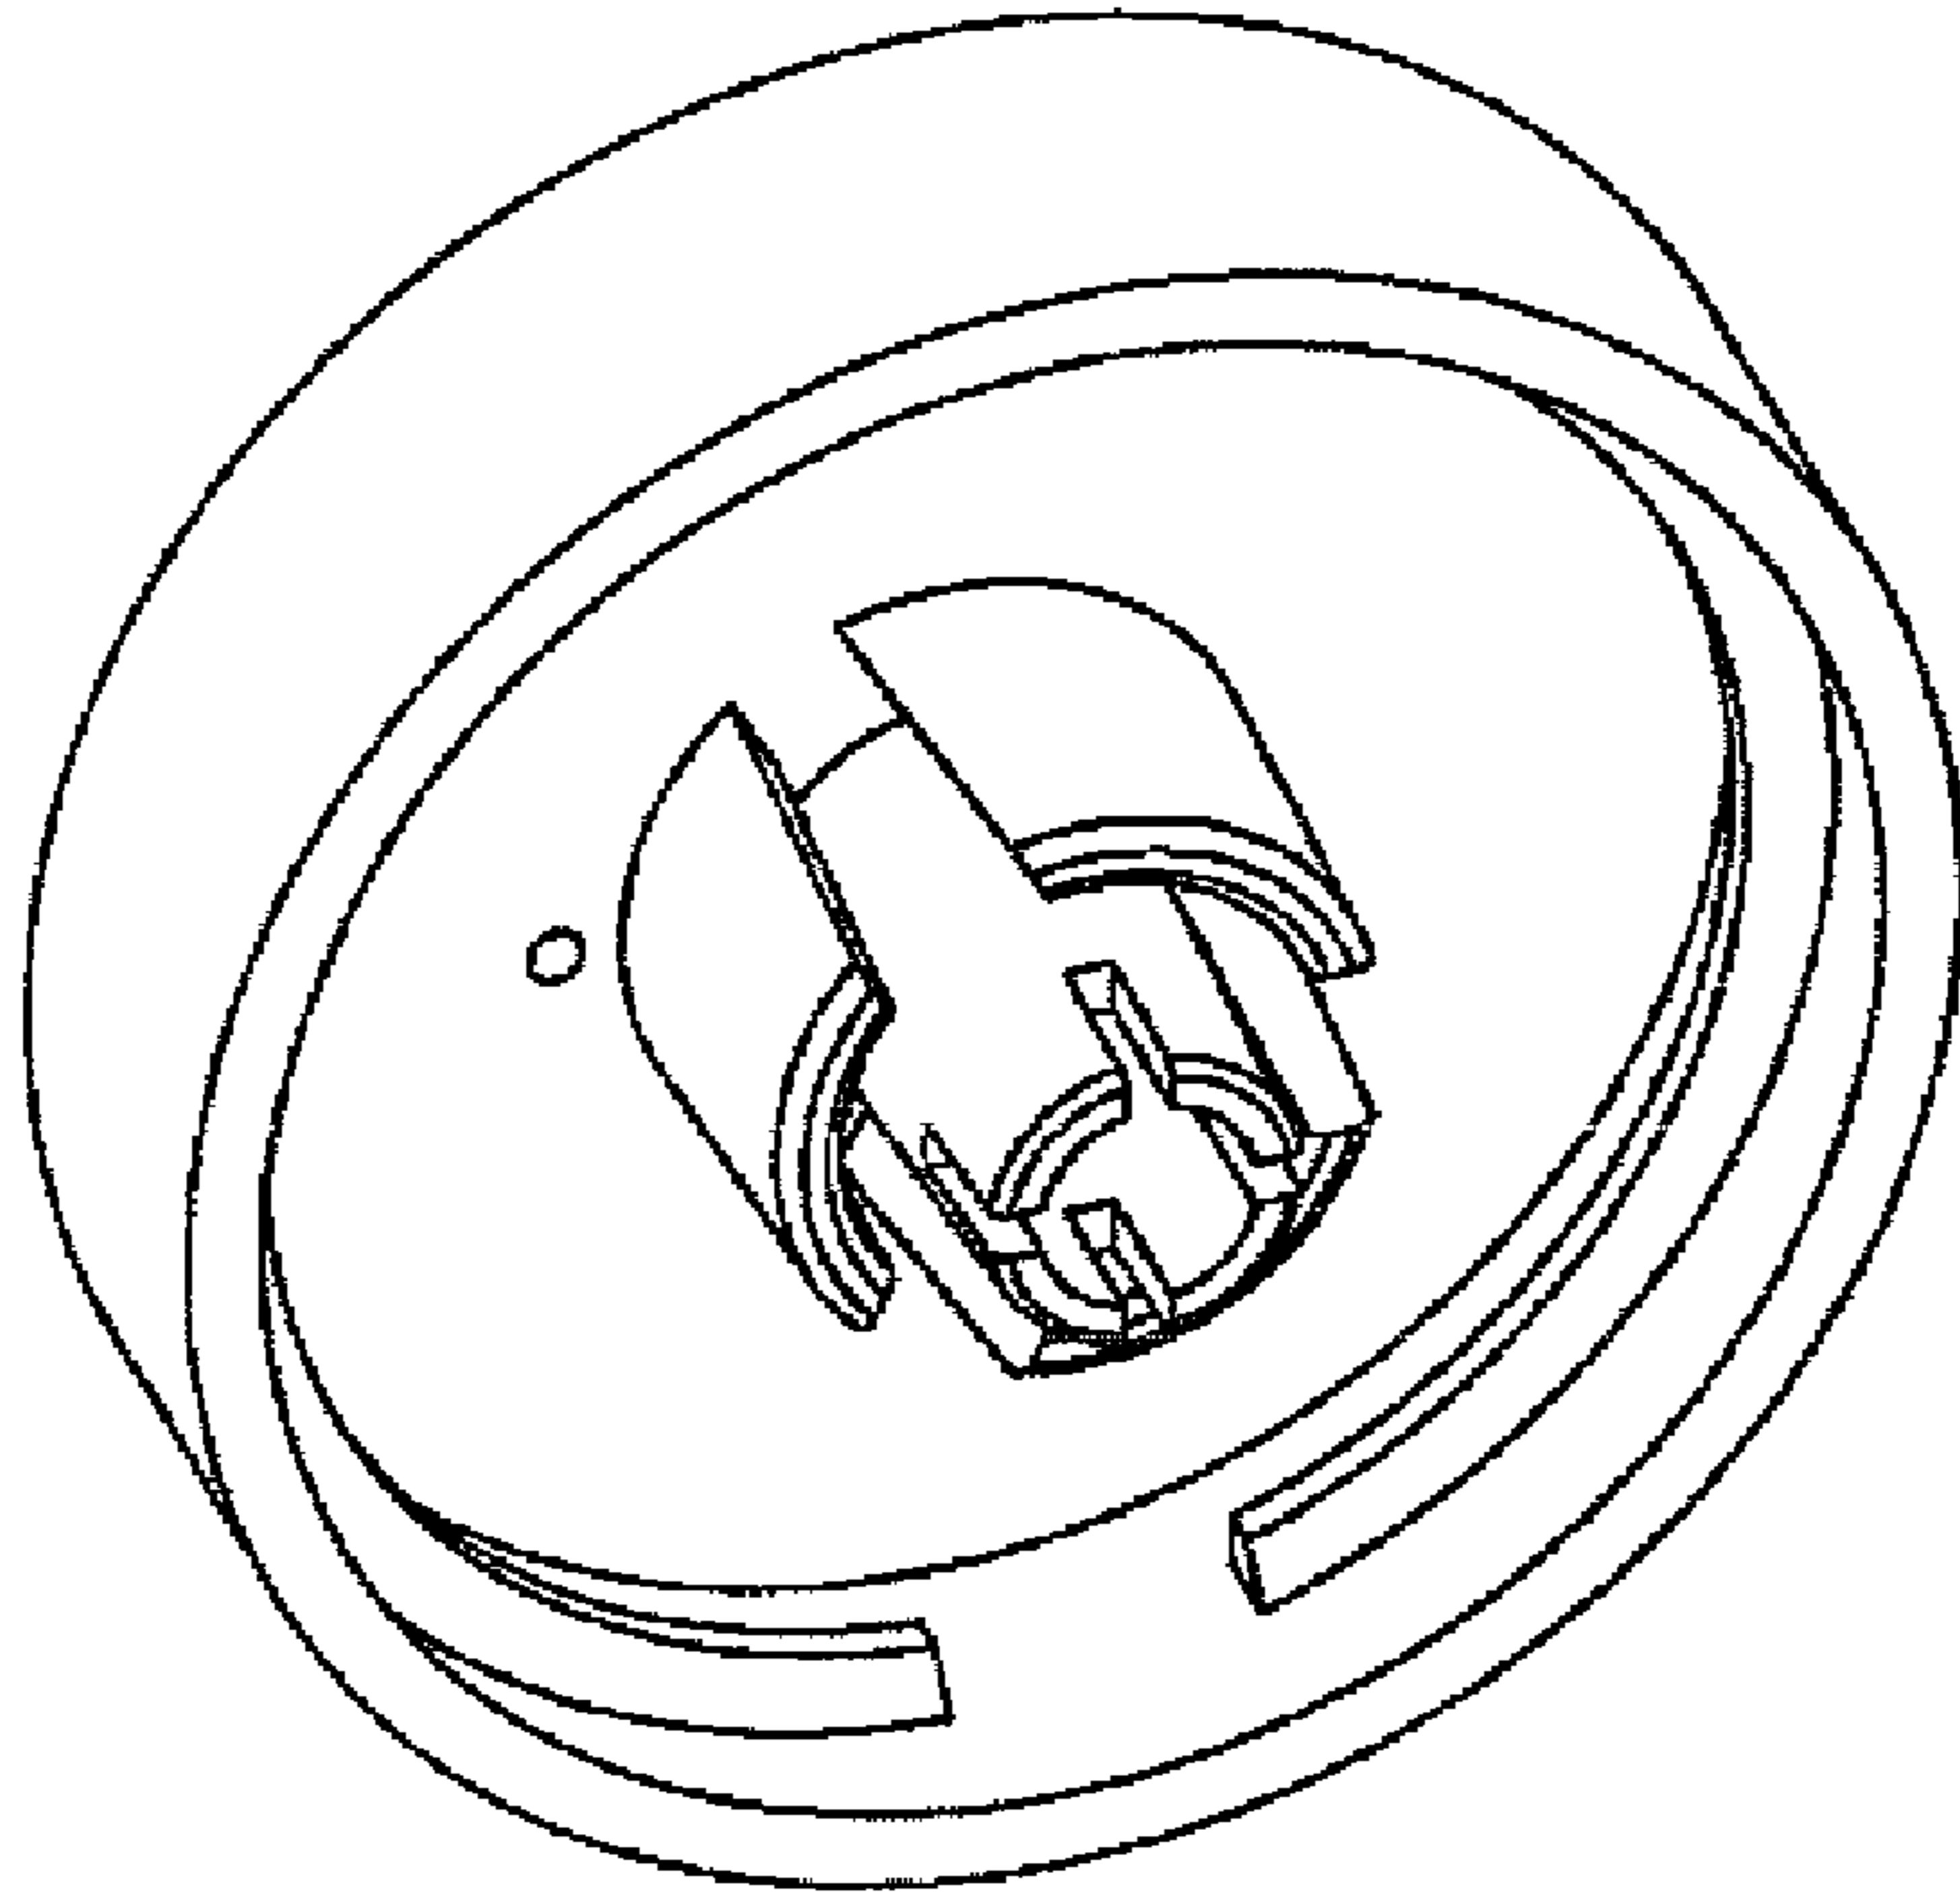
is a top perspective view of a dispensing bottle cap; FIG. 2 is a bottom perspective view of the bottle cap shown in FIG. 1; FIG. 3 is a top view of the bottle cap shown in FIG. 1; FIG. 4 is a side view of the bottle cap shown in FIG. 1; and, FIG. 5 is a bottom view of the bottle cap shown in FIG. 1.
